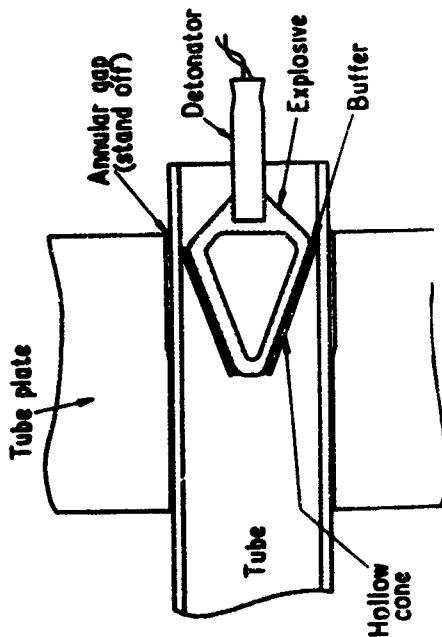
Schematic for Explosion Welding Tube to Tubeplate Using a Supersonic Detonation Rate Explosive and Hollow Cone (3).
